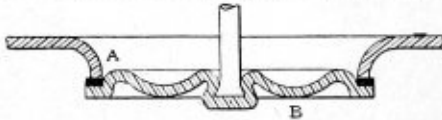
REINFORCEMENT OBTAINED BY FLANGING THE HOLE.
